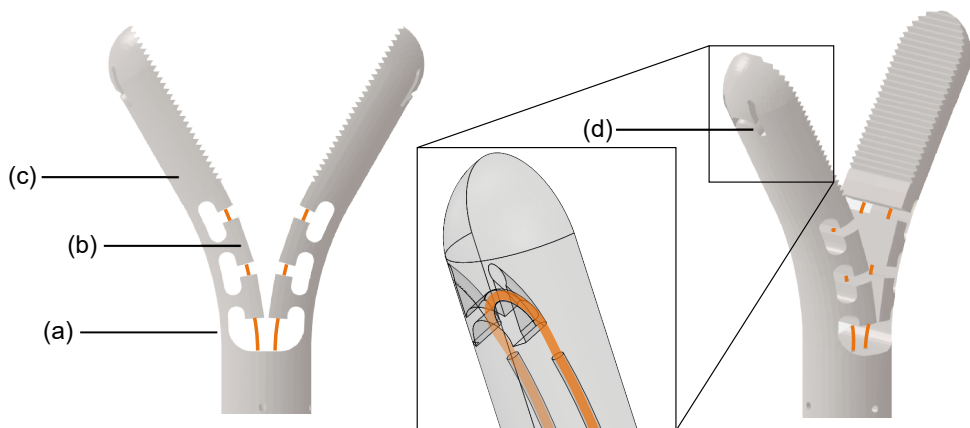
Gripper. (a) Compliant beam. (b) T-shape guiding section for the actuation cables. (c) Jaw. (d) Cable fixation point with its close-up made transparent with black outline. Teeth have been removed for clarity.
